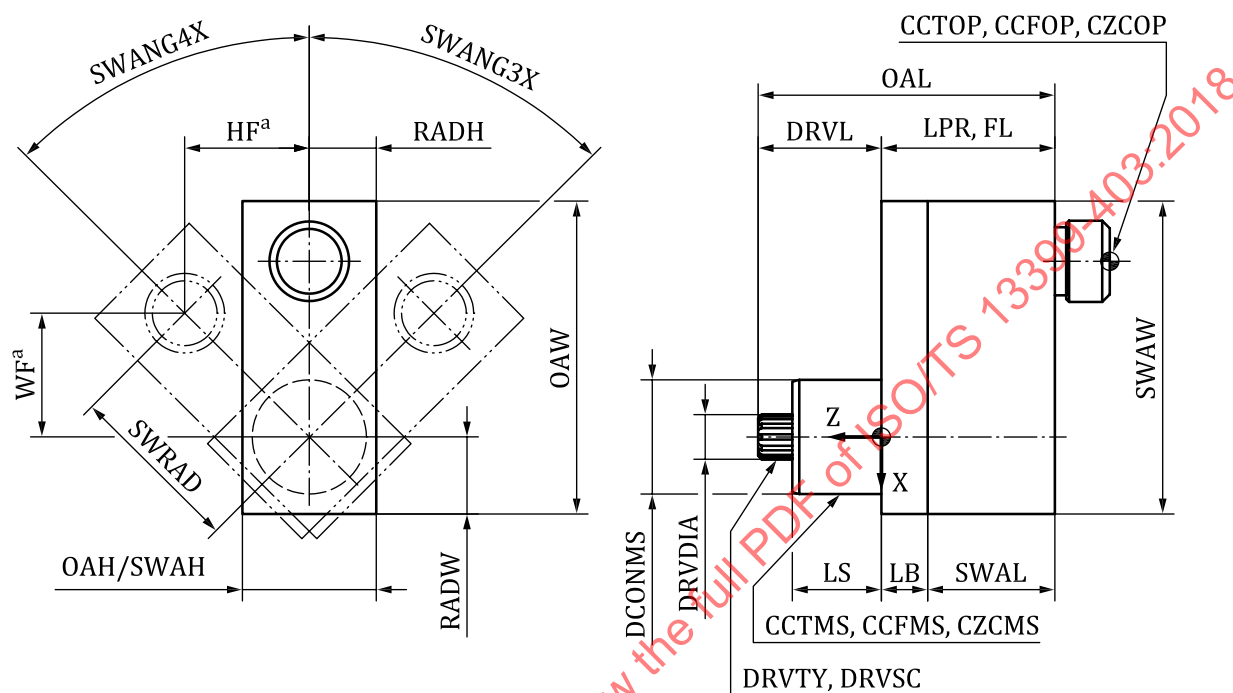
Assembled driven tool unit with rotatable design about the y-axis
